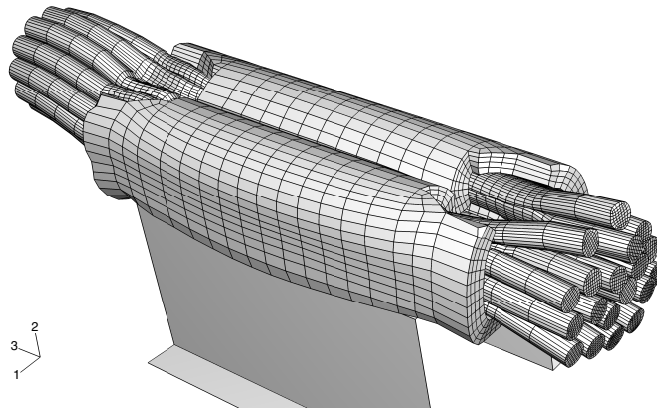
Isometric view of the final deformed configuration for the wire-grip assembly (the rigid punch is not shown).
